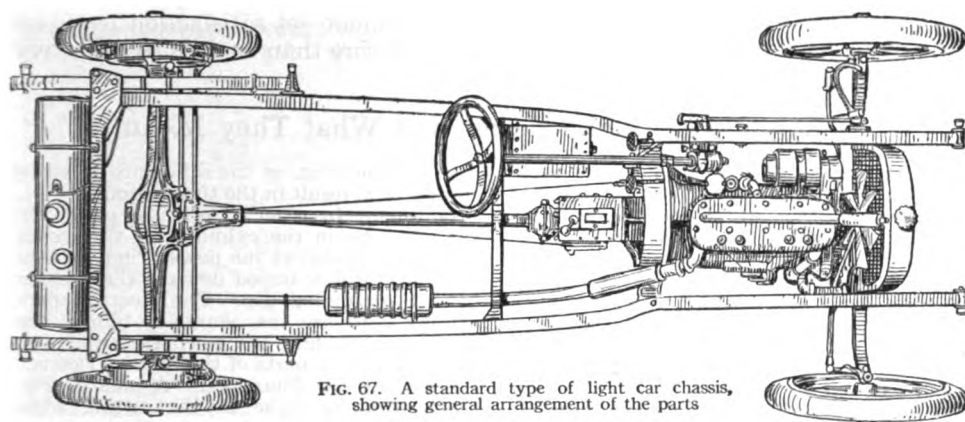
A standard type of light car chassis, showing general arrangement of the parts
